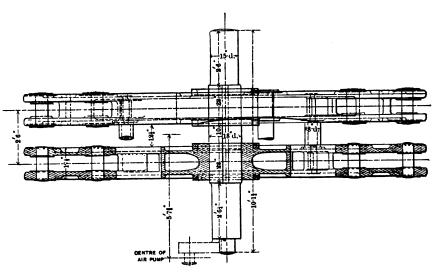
Beam.-Sectional Plan at Center Line A A.
